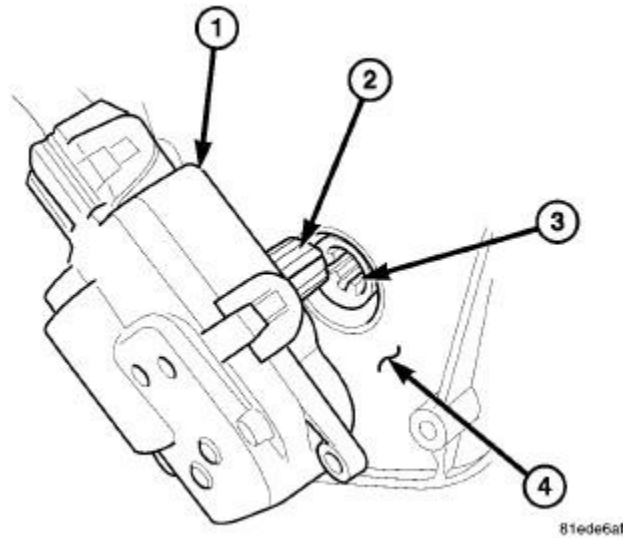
Blend Door Actuator, Distribution Housing, Output Shaft & Cam
